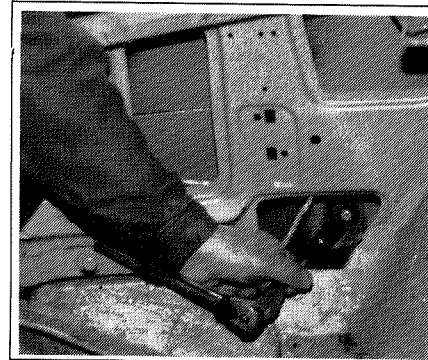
To drop the rear bumper (OK, so I'm fed up with writing remove!) a socket placed on an extension bar is needed to capture the nut, access to which is gained through the inner wing for the front bolts.
